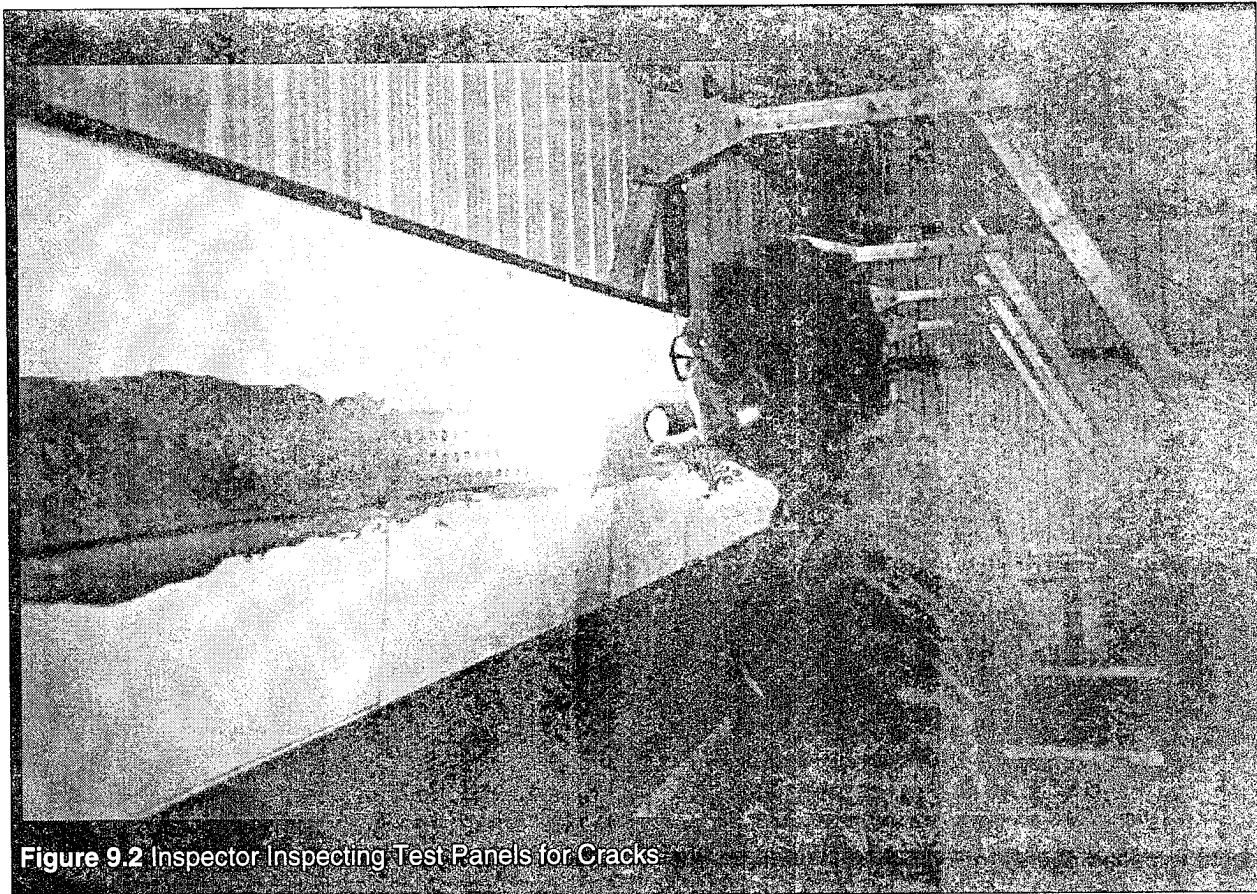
Inspector Inspecting Test Panels for Cracks
